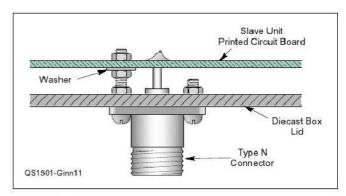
Slave unit printed circuit board mounted on connector screws.
